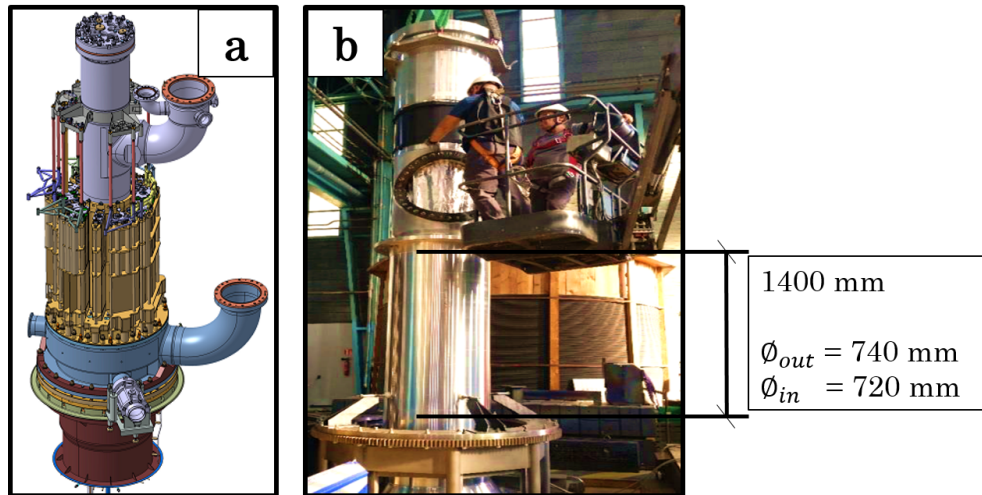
(a) Reactor's core, (b) vessel rack assembly holding the fuel rods inside, dimensions of the central shaft are noted
